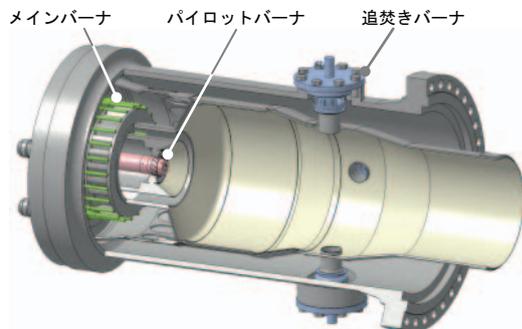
DLE Combustor geometry of Kawasaki gas turbine
